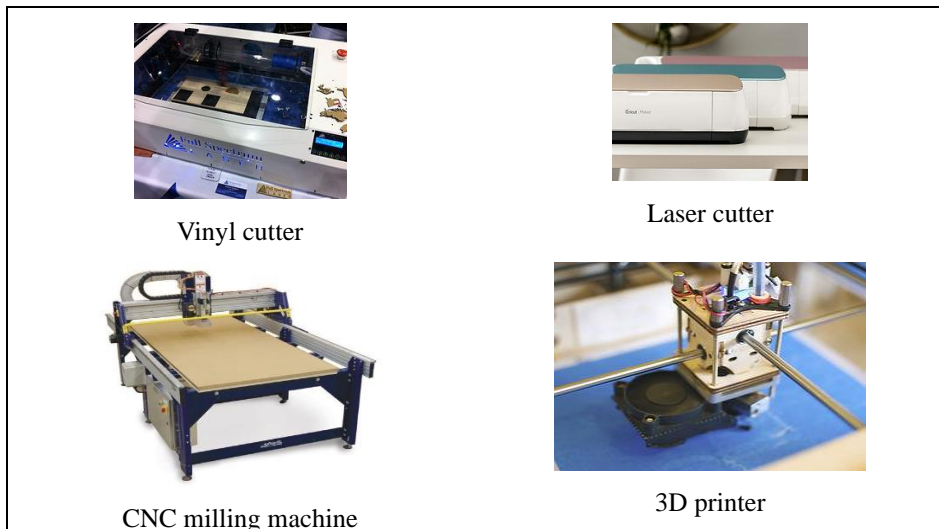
Examples of Equipment and Tools Used in Makerspaces at Saudi Universities
